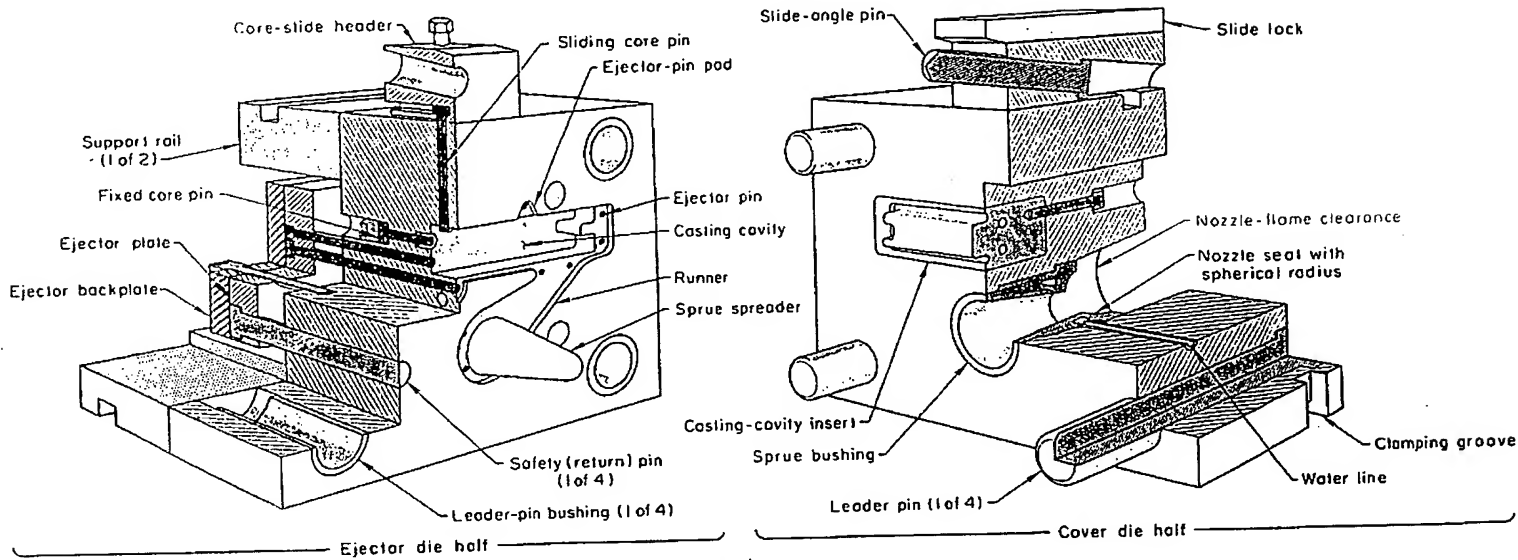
Components of a single-cavity die casting die for use in a hot chamber machine
